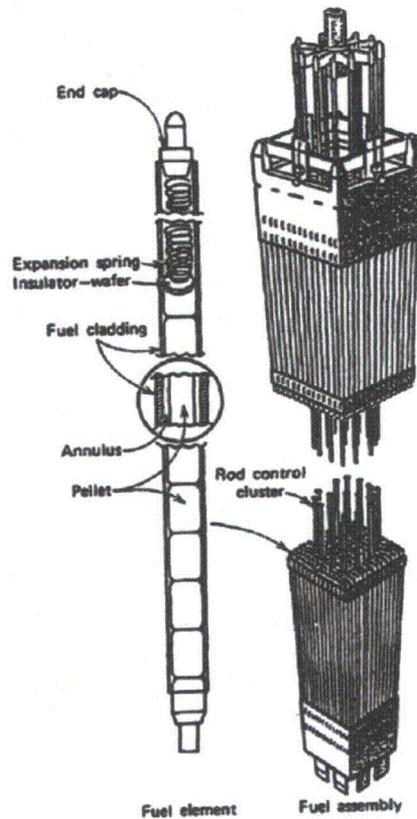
Fuel rods, also called fuel pins or elements, are bundled together into fuel assemblies as shown here. This fuel assembly is for a PWR reactor. SOURCE: Duderstadt and Hamilton (1976; Figure 3-7).
